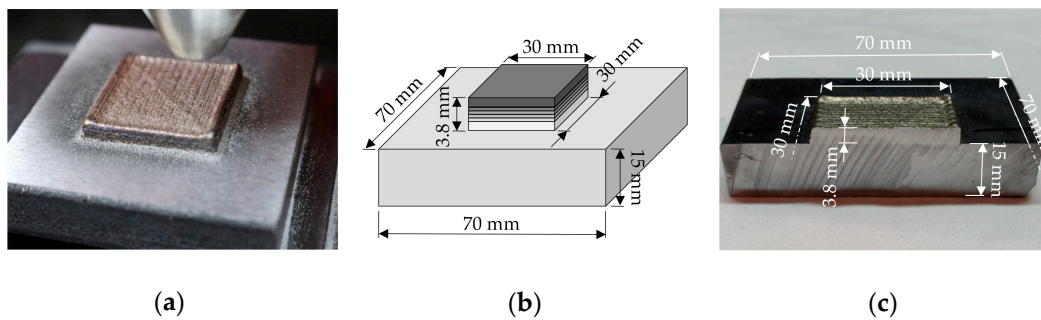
Dimensions of the manufactured samples: (a) functionally graded material (FGM) sample during the L-DED process, (b) schematic illustration of the fabricated FGM sample with dimensions, and (c) fabricated FGM sample with dimensions.
